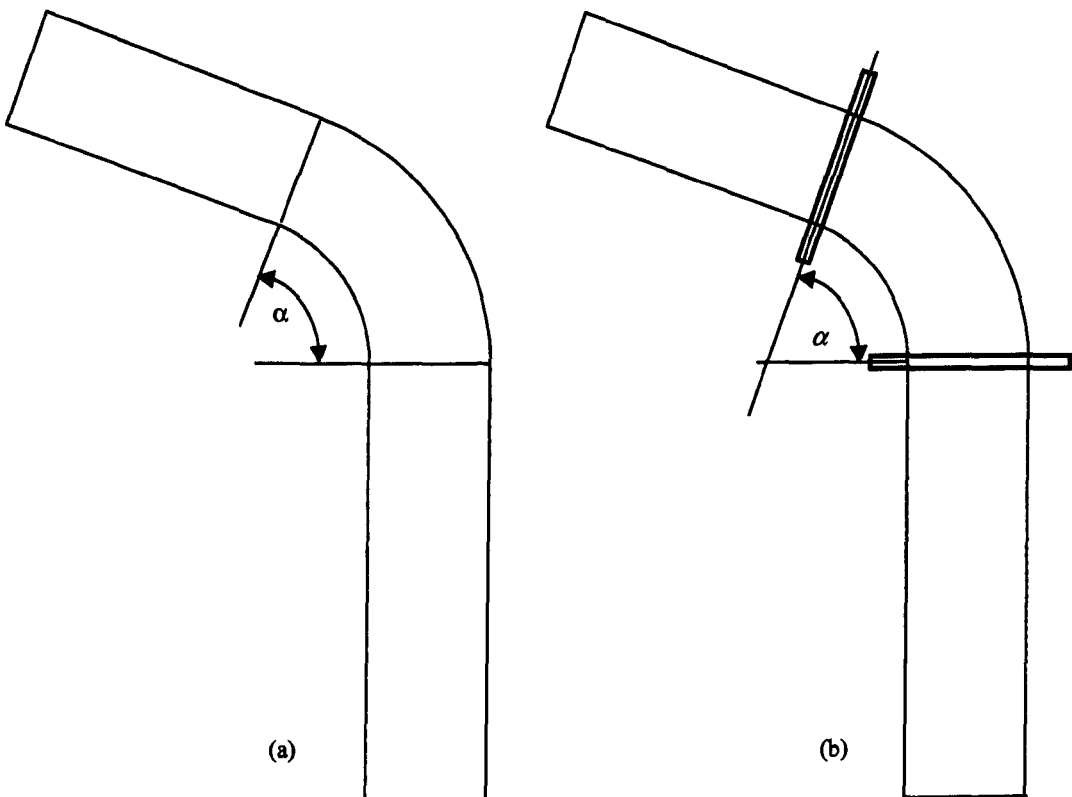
(a) Pipe bend jointed smoothly (tangent) to straight pipes, (b) Pipe bend jointed to straight pipes by flanges
